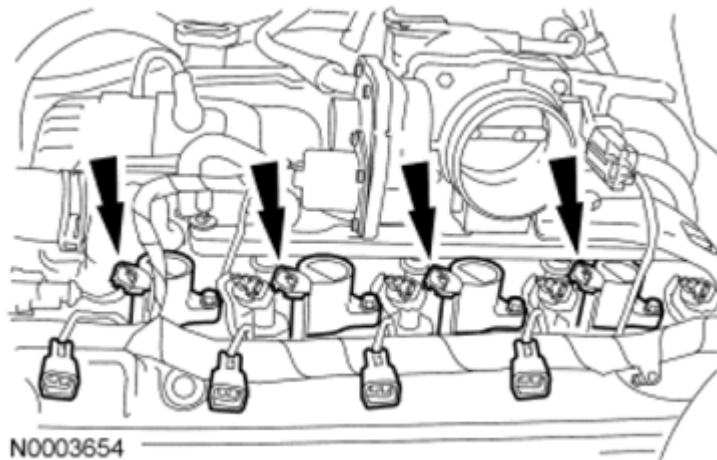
Locating Bolts And Intake Manifold Shield
